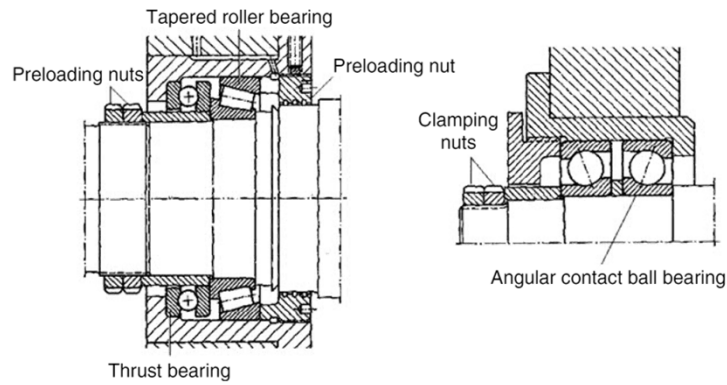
Typical spindle-bearing arrangements. (From Browne, J. W., *The Theory of Machine Tools, Book-1*, Cassell and Co. Ltd., London, 1965.)
